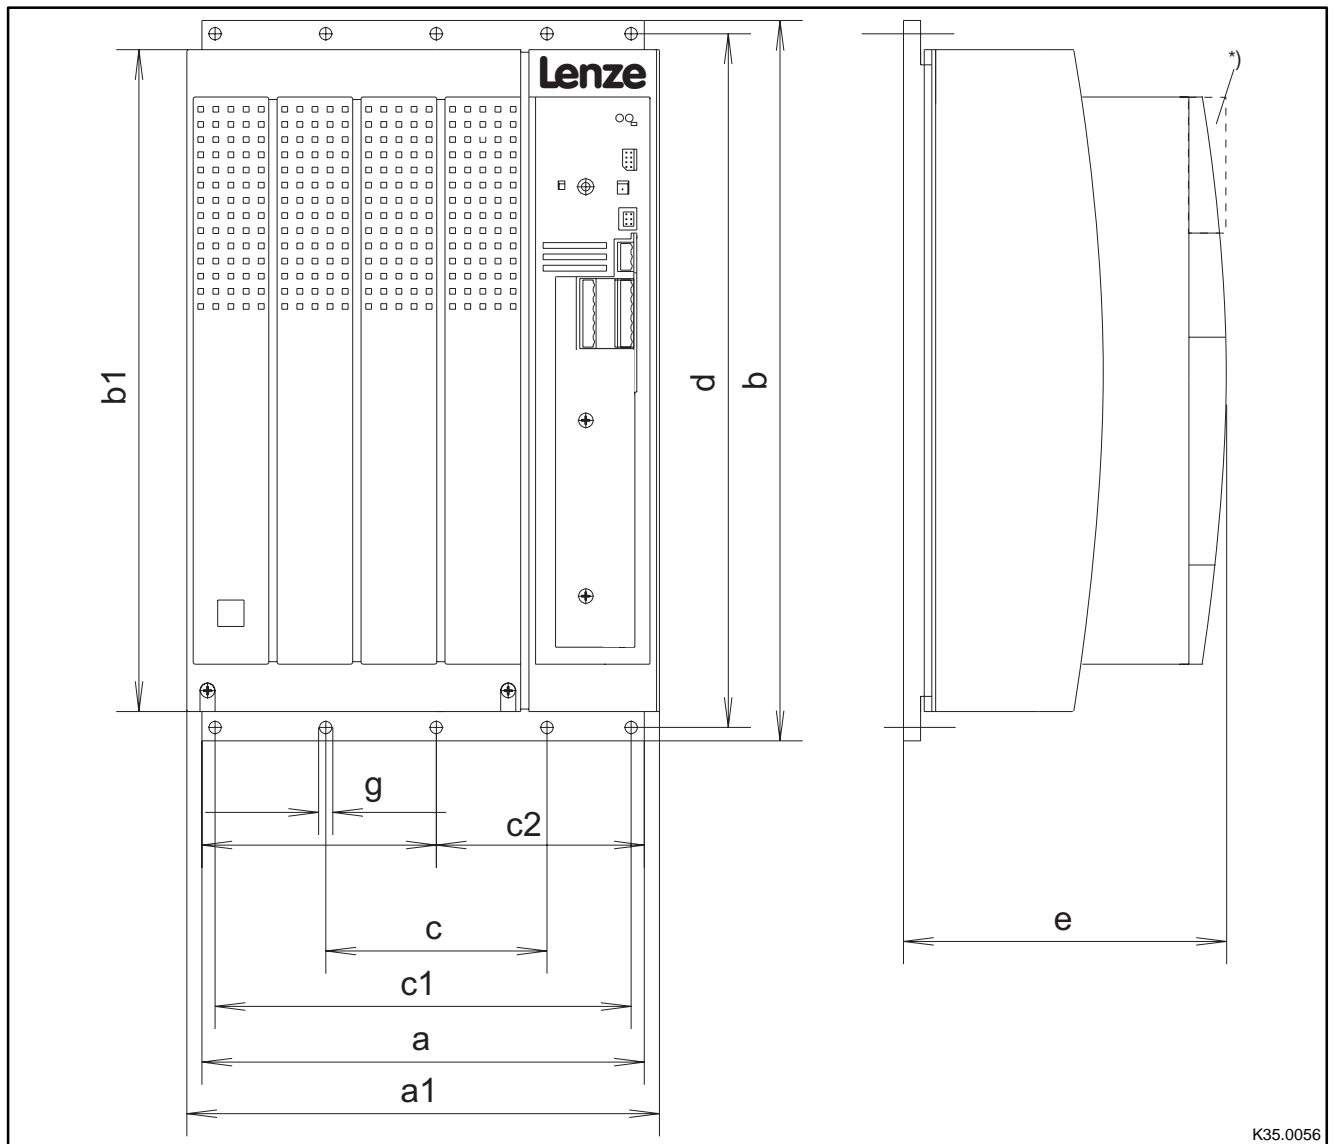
Dimensions for assembly in "Cold Plate technique"
